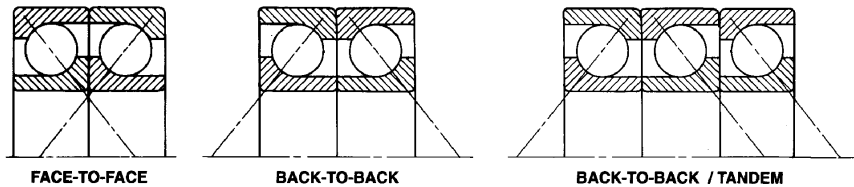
Paired bearing arrangements (SKF USA, Inc.)
